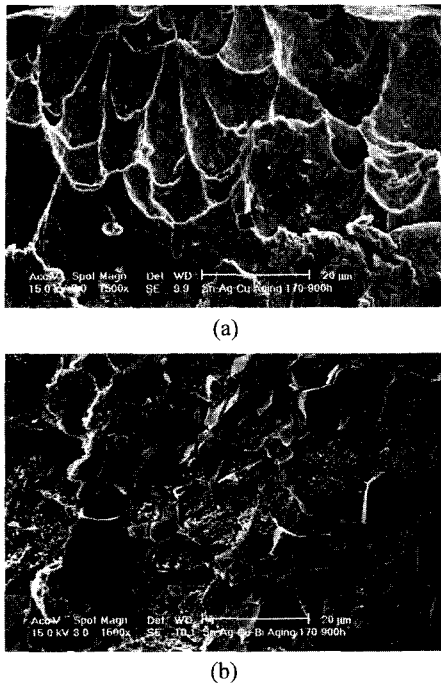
Fracture surface of solder ball after aging at 170°C for 900 hrs (a) Sn-3.5Ag-0.75Cu (b) Sn-2.0Ag-0.7Cu-3.0Bi.
